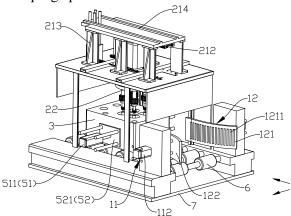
Illustration of the Construction of the Chamfer Processing Unit
